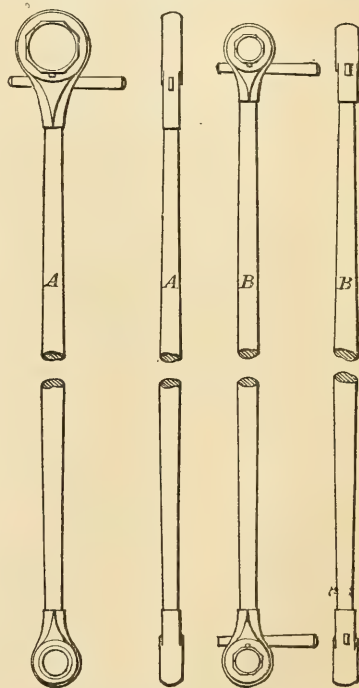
Parallel and Radius Rods for Parallel Motion. — A, Parallel rod. B, Radius rod.
